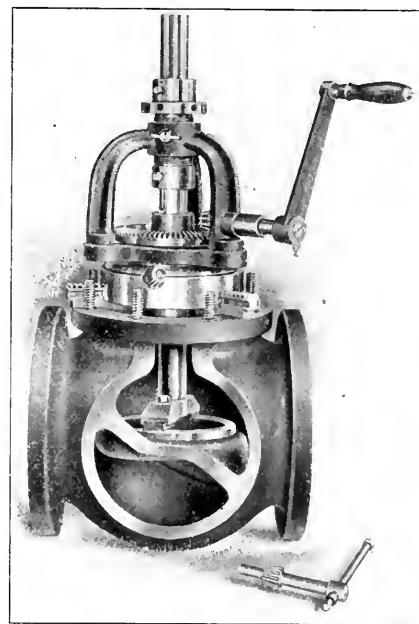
DEXTER MACHINE FOR RESEATING VALVES UP TO 12 INCHES IN SIZE
